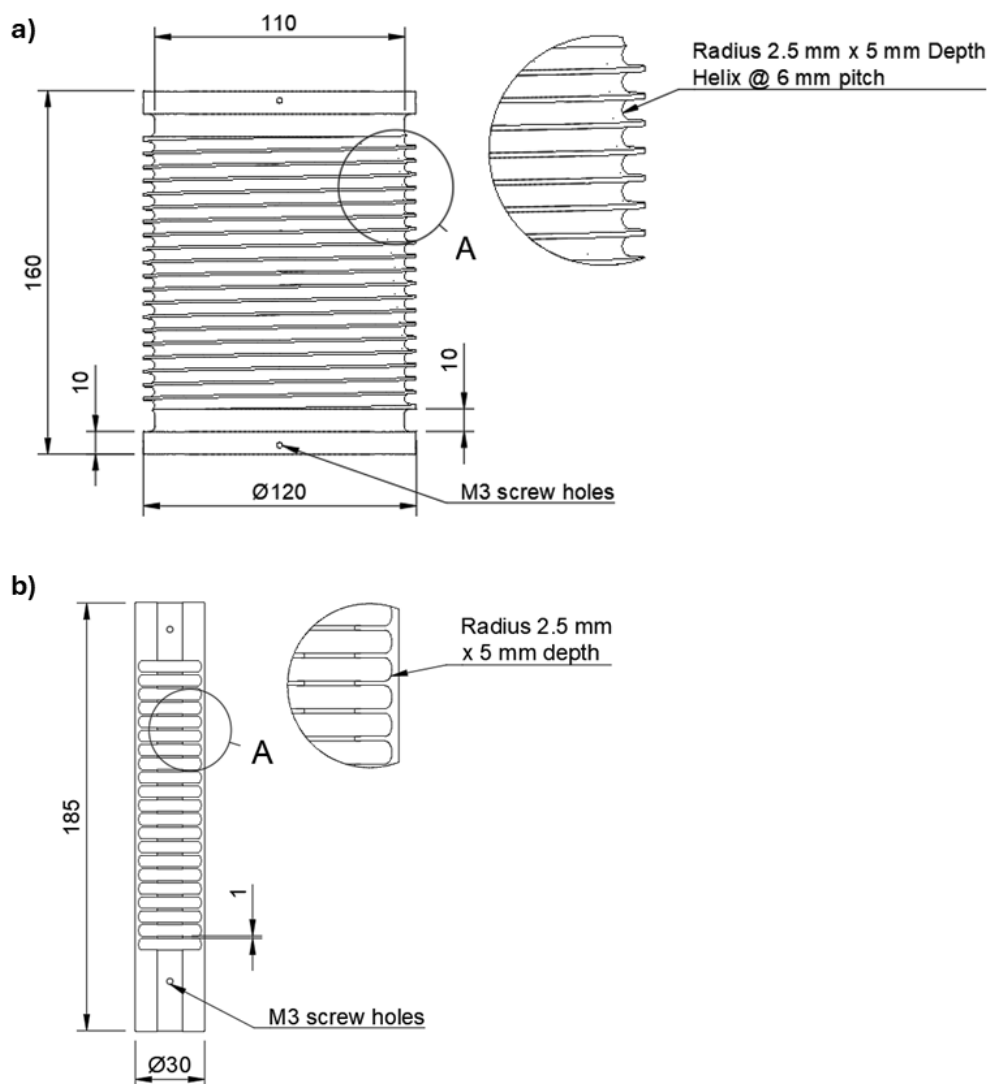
CAD drawing of KRAIC-S v3 parts, measurements shown in mm of a) the main column with continually increasing height helix for tubing, and b) X-ray guiding posts for the X-ray windows. Clamp bars for holding tubing in place screw into M3 screw holes in crystalliser.
